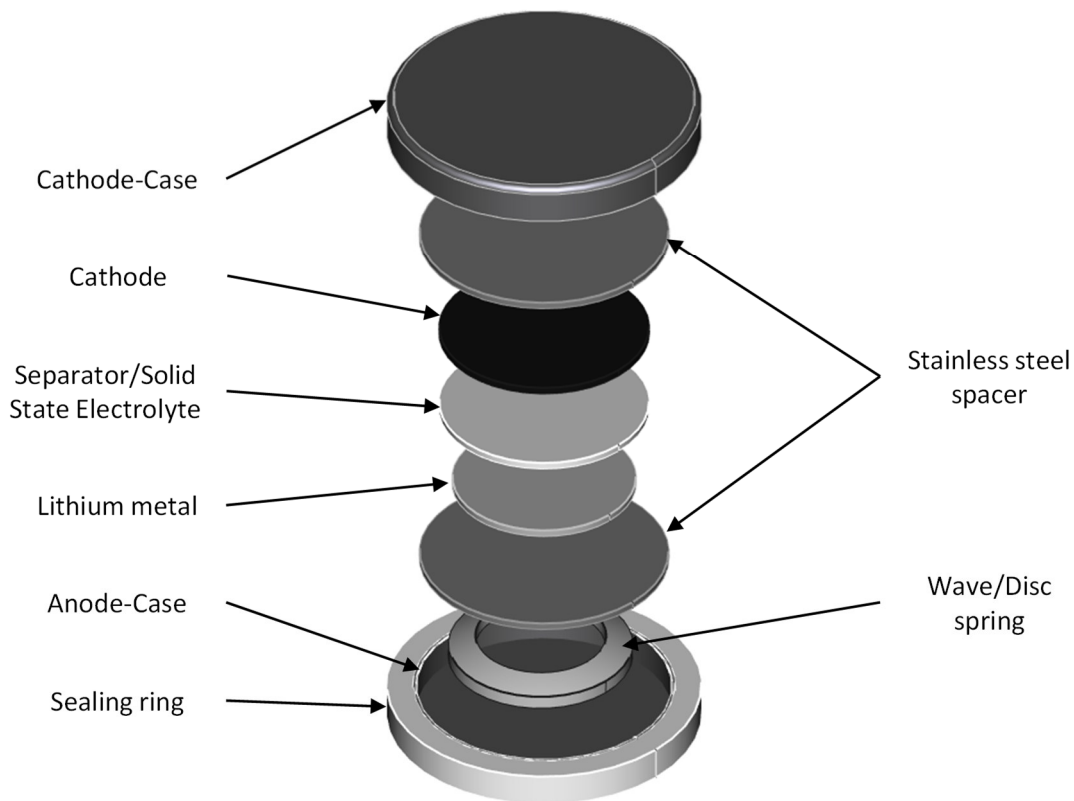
Exploded view schematic of a Coin Cell used in this thesis
